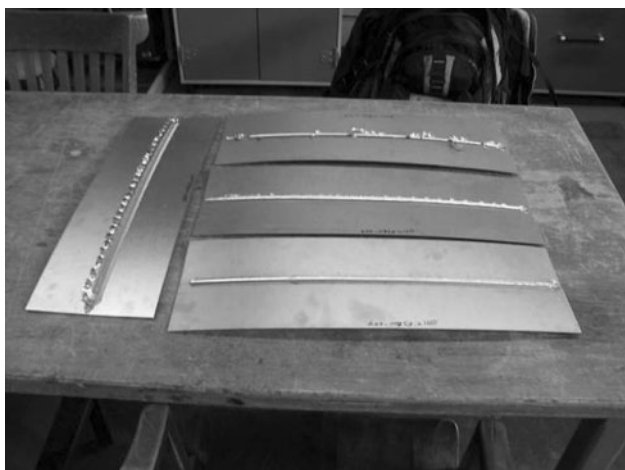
A set of four of the FSW test panels is shown in this photo after joining
